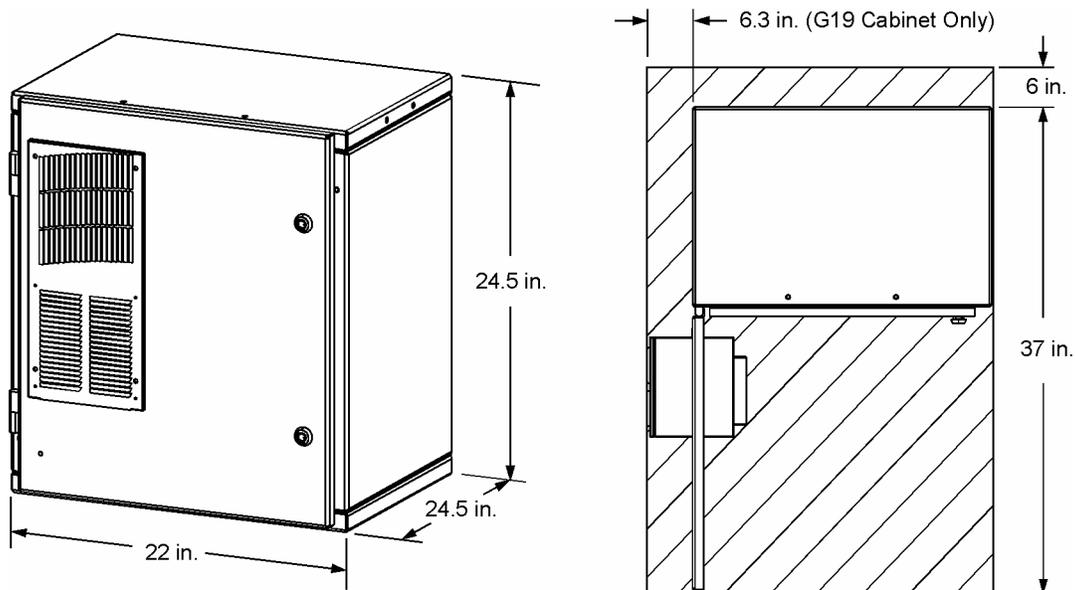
G18/G19 Cabinet Dimensions and Clearances
